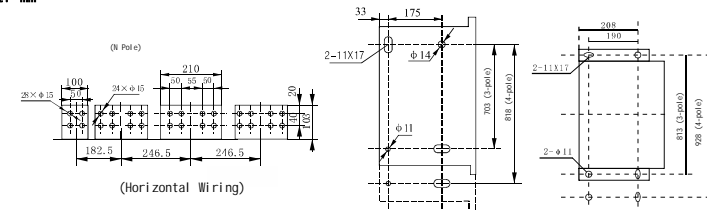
Installation Dimensions and Outline Dimensions of Drawer-Type Circuit Breaker (XLDW1-6300, 6300/4 In=400A, 5000A)
